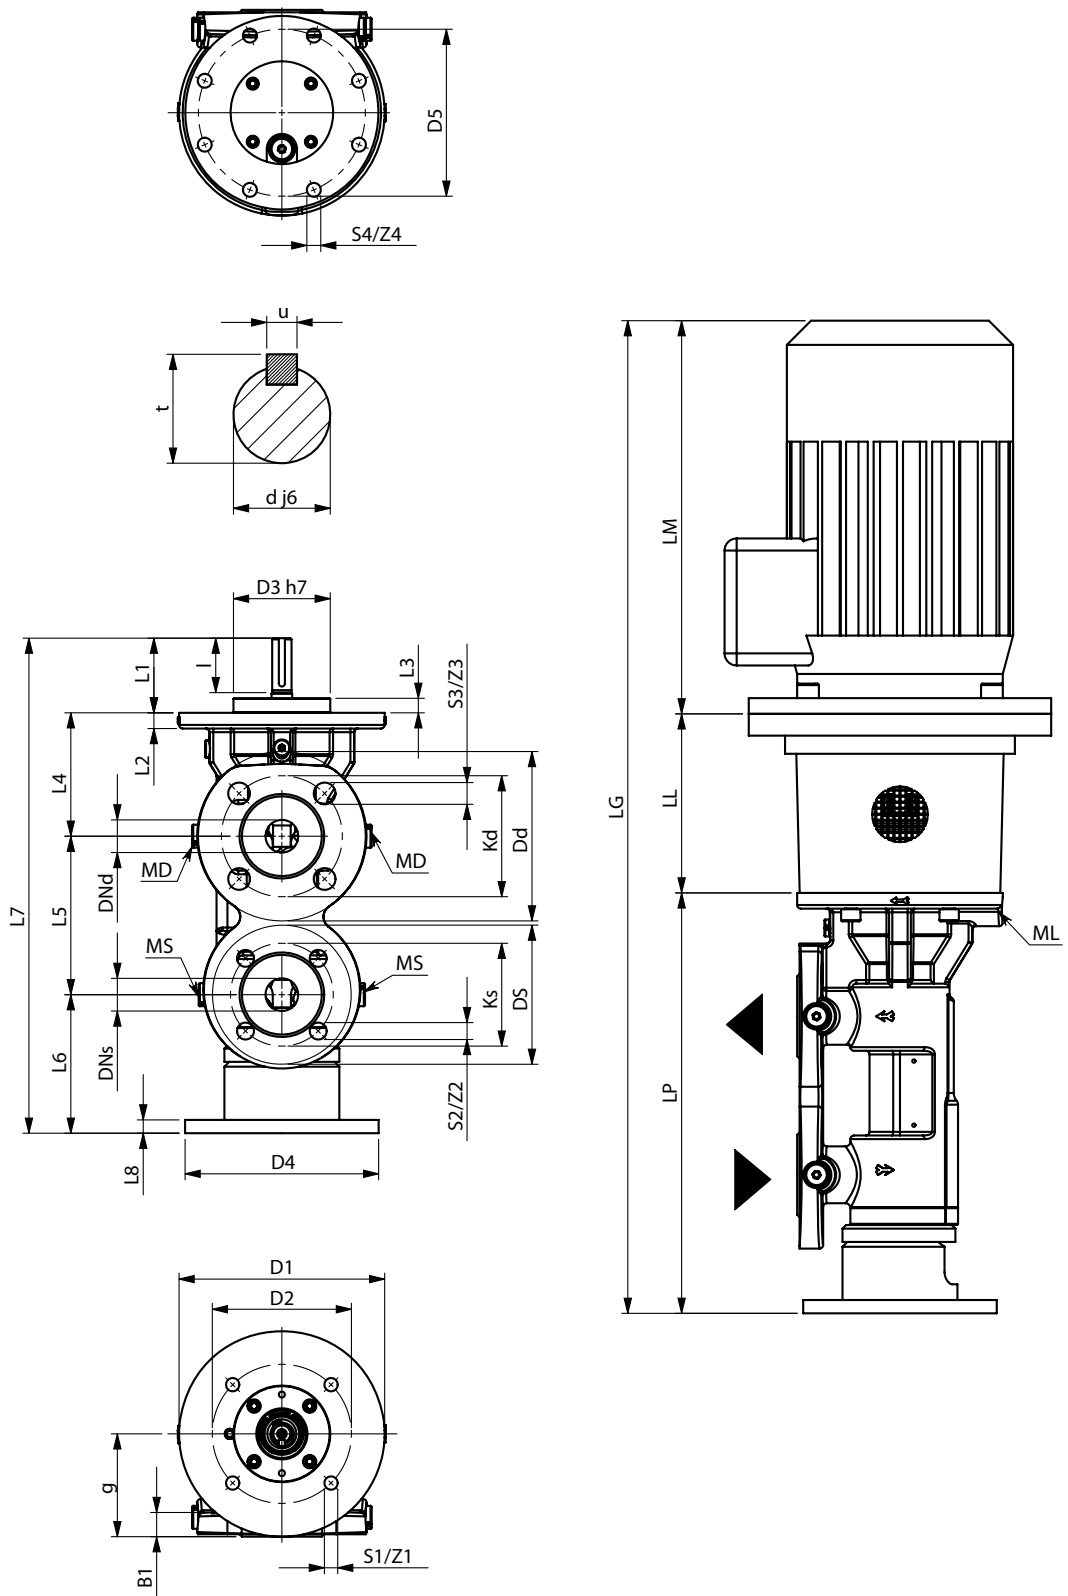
Dimensional drawing of LVT-pump and pump unit
